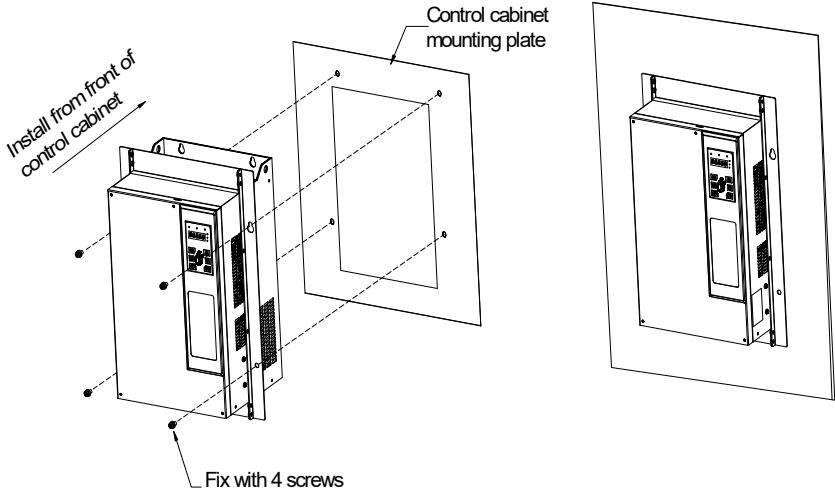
Embedded Installation Diagram of Sheet Metal Structure
